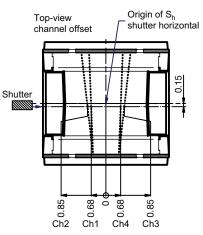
Top View Sensor, Channel Positions and Origin of Horizontal Shutter, tolerances  $\pm$  0.2 mm
